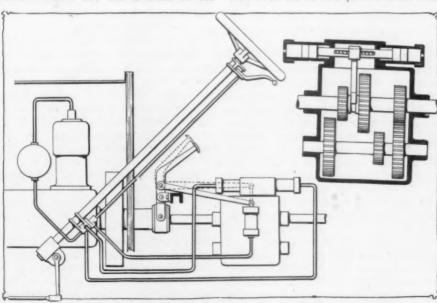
IRISH FLUID-PRESSURE GEARSET MECHANISM
